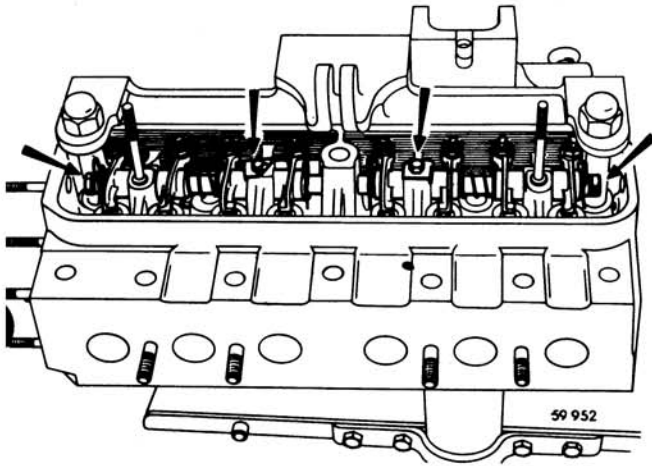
INSTALLING ROCKER ARM ASSEMBLIES
